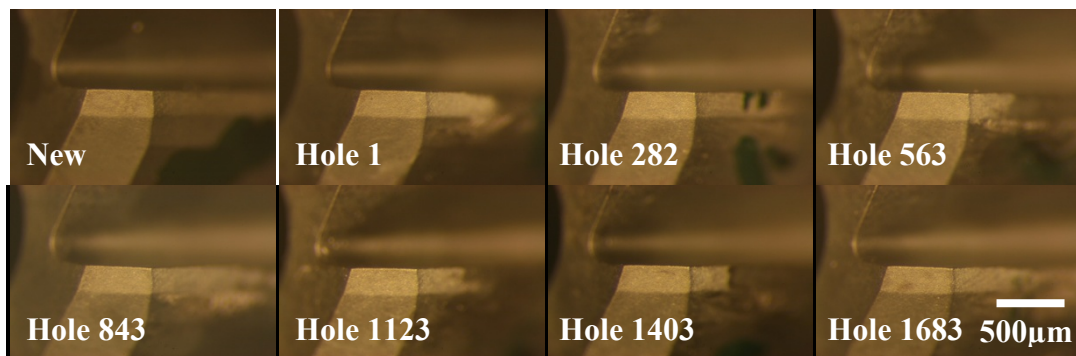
Tool wear micrographs of CVD diamond coated reamer under 70bar through-hole cutting fluid, 32m/min cutting speed (Test 3)
